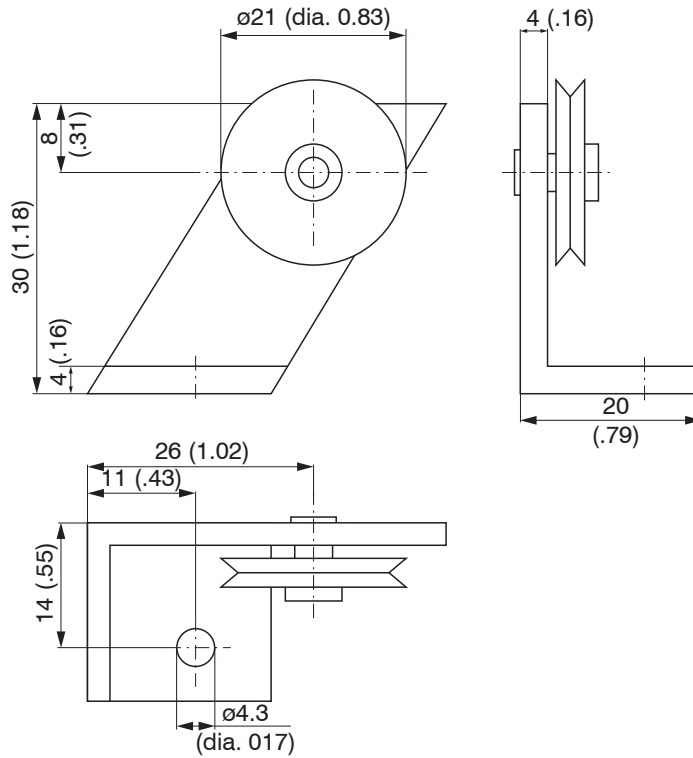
Guide pulley TR3-WDS with mounting socket, dimensions in mm (inches), not to scale
